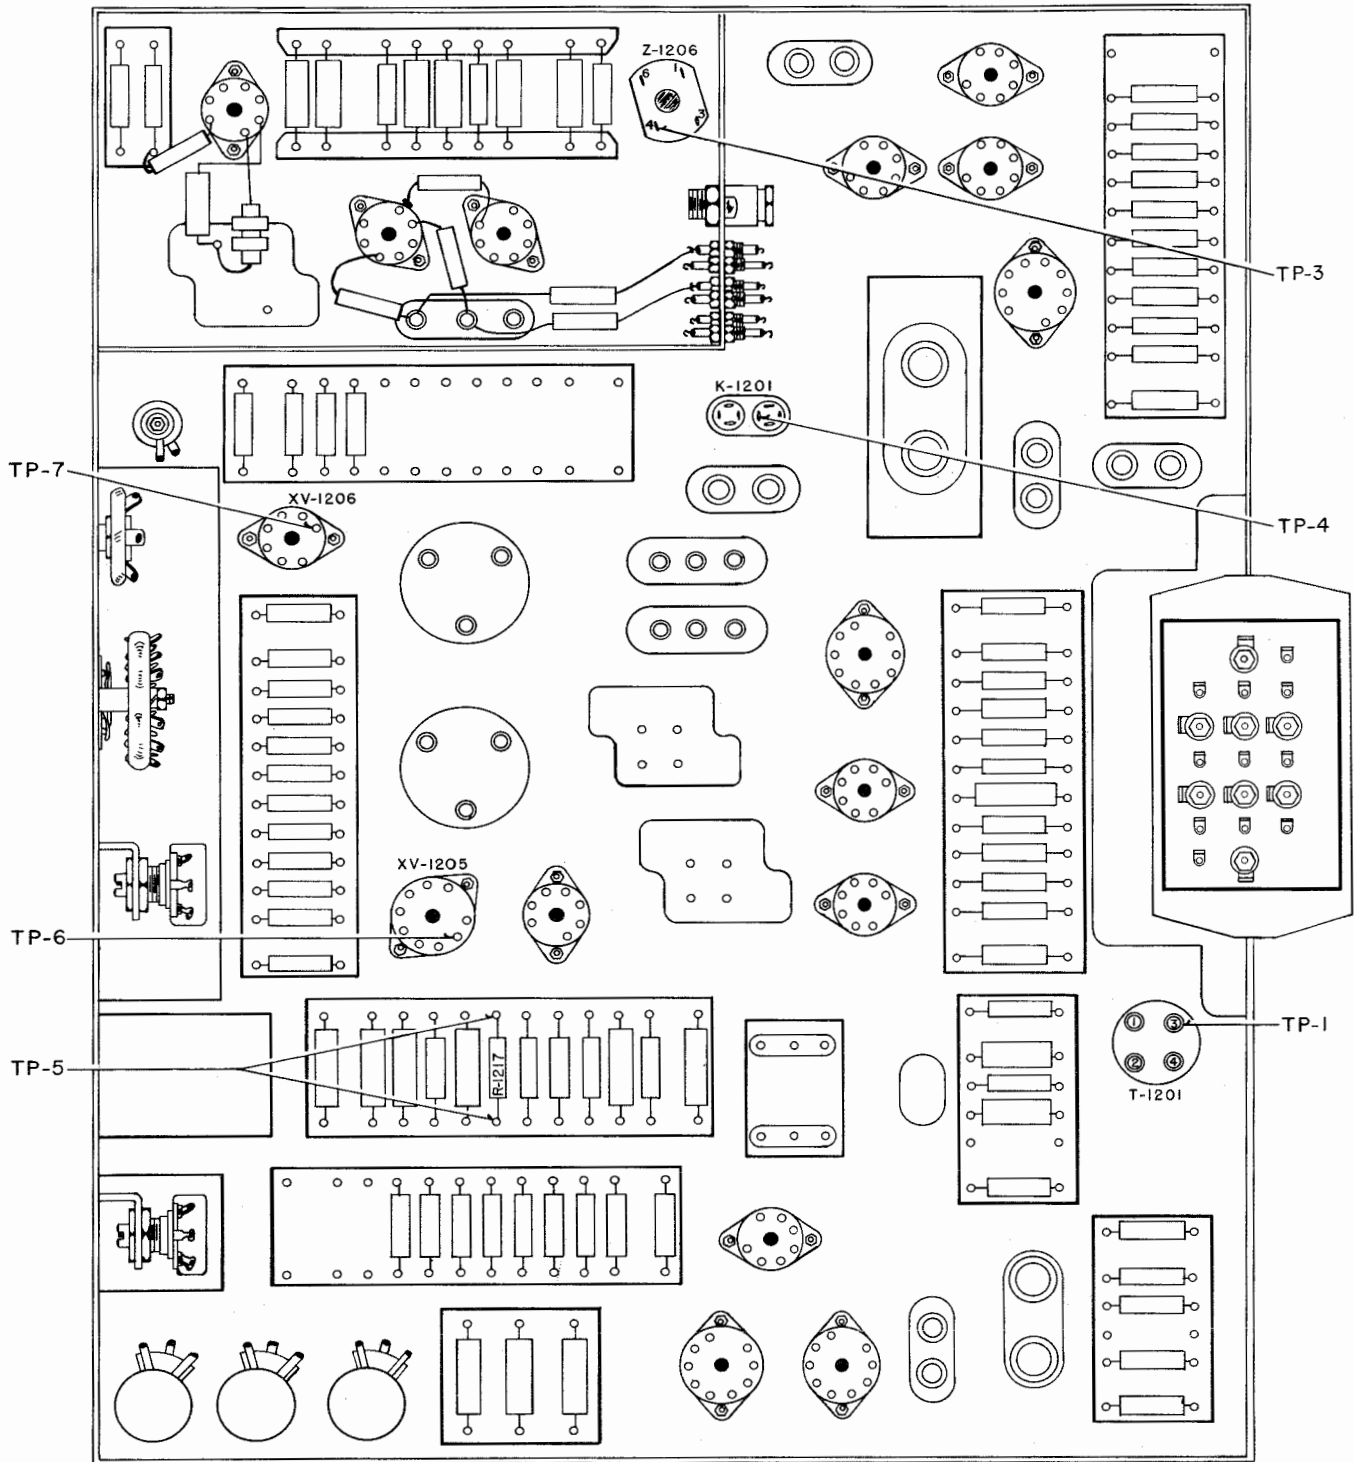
Test Point Locations Bottom of Chassis, F.S. Converter CV-127/FRR-24
